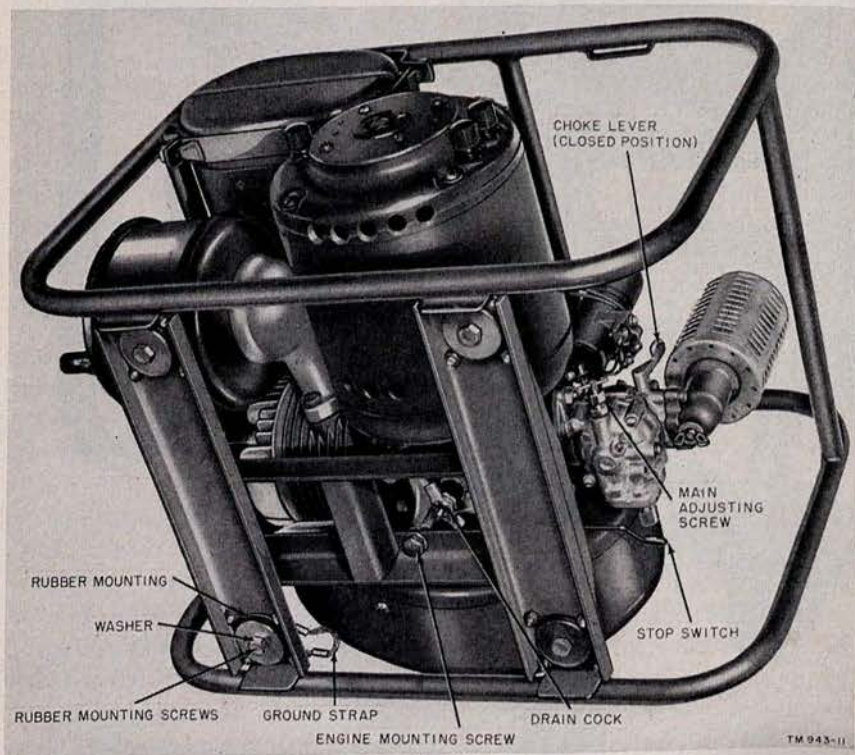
Engine Generator PU-181/PGC-1, bottom view.
